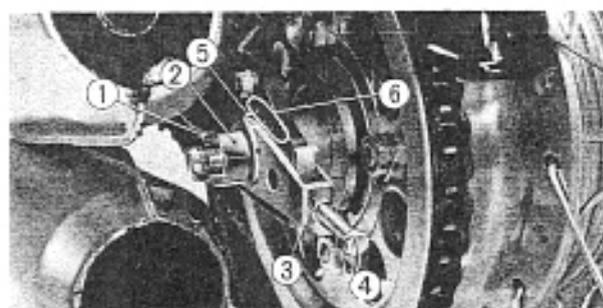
① Cotter pin ④ Adjusting nut
